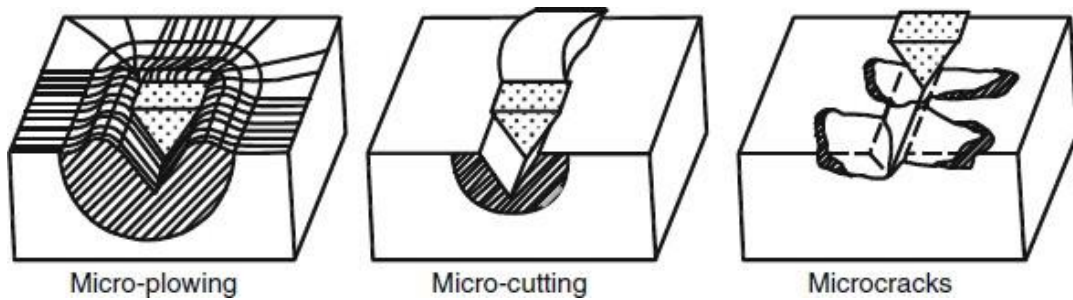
Abrasion and support details in Inconel 718 machining with uncoated PCBN tool
